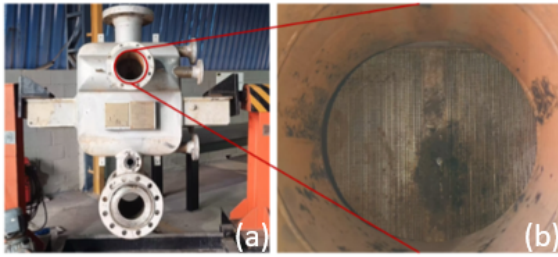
(a) External view of a Printed Circuit Heat Exchanger (PCHE), showing the main inlet and outlet nozzles; (b) Internal view through the inlet nozzle.
